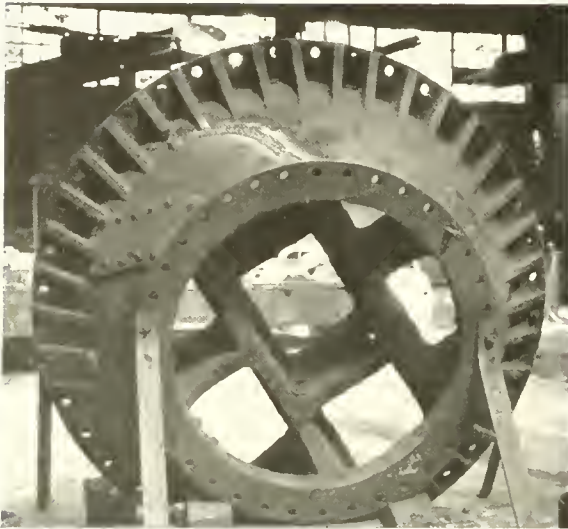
Large steel casting repaired by arc welding after it had been in service. This casting also been repaired once by riveting. Note how much cleaner the welded job is.
